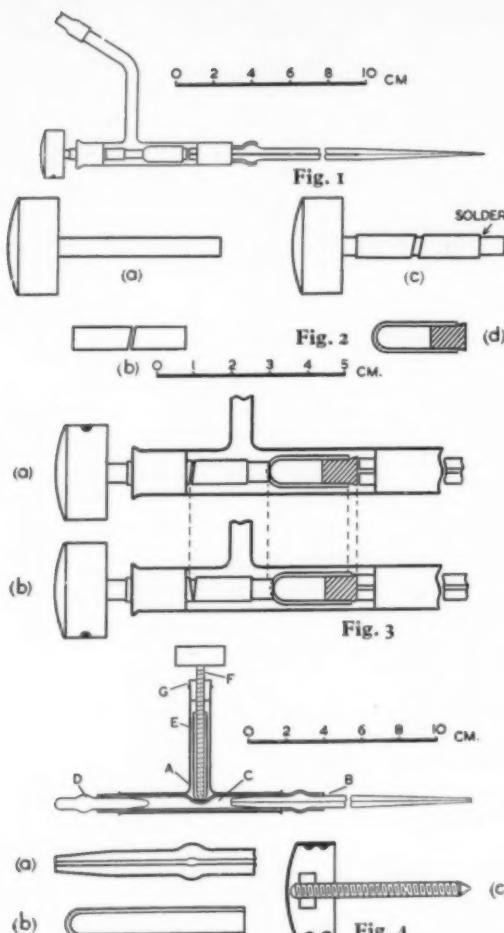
Cam-action microburette. Fig. 2.—Construction of parts of control mechanism. Fig. 3.—Principle of control mechanism. Fig. 4.—Compression-type microburette.
